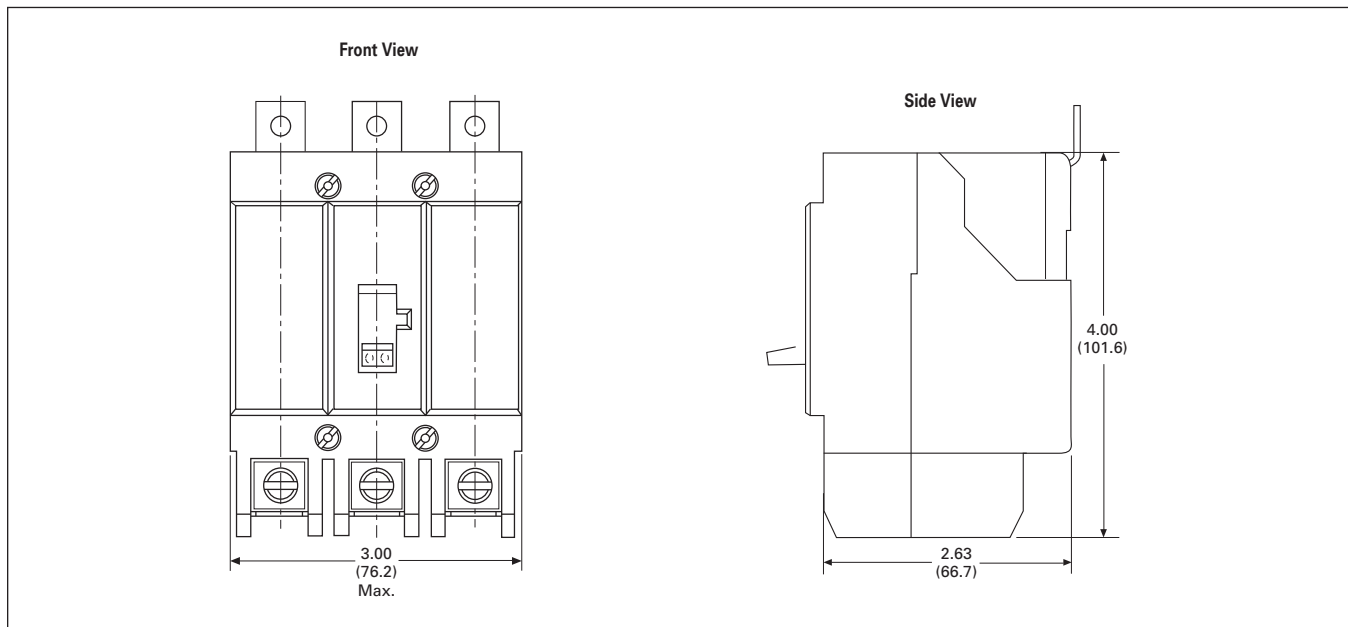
GDB-Frame, 3-Pole — Dimensions in Inches (mm)
